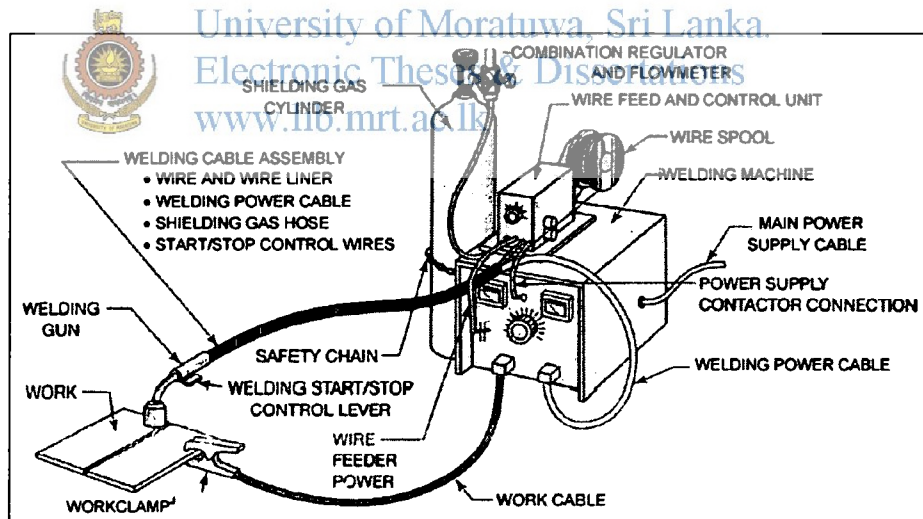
Gas Metal Arc Welding Equipment. [ 1 ]
